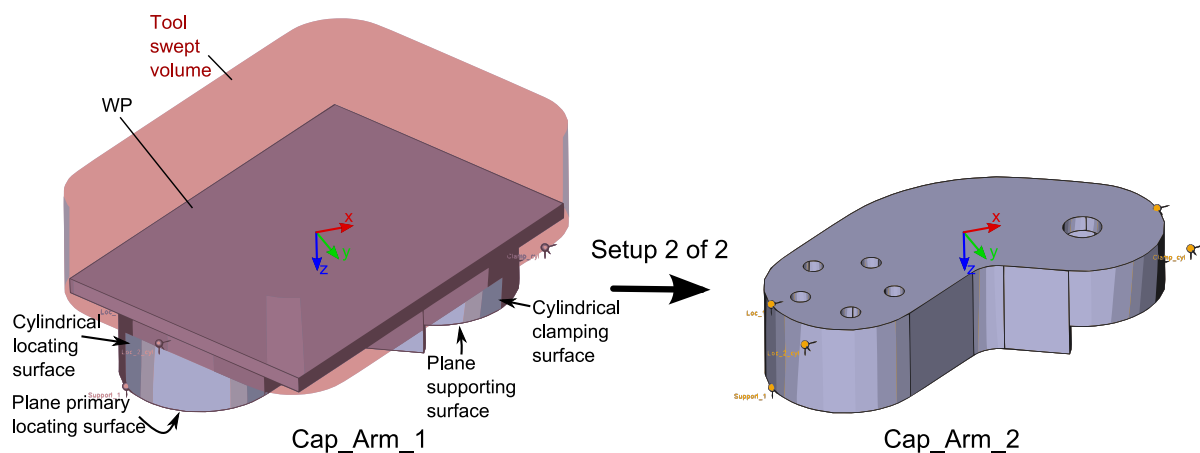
Setup 2 of 2 of workpiece Cap_Arm with cylindrical locating and cylindrical clamping surface
